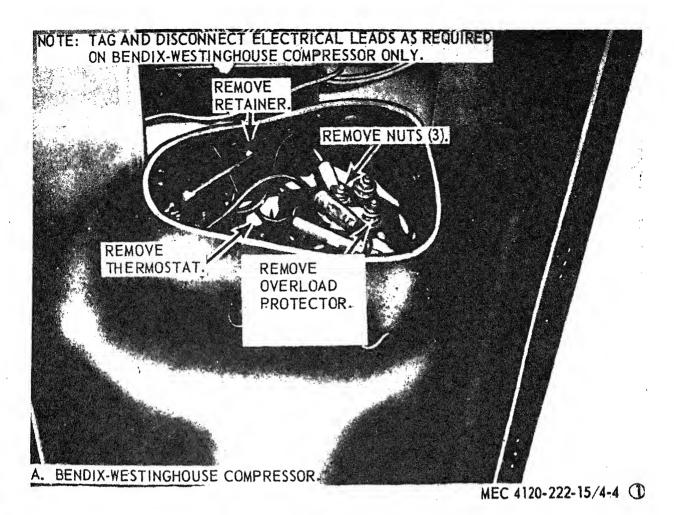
Compressor overload protector and heater thermostat removal and wiring. (Sheet 1 of 2)
